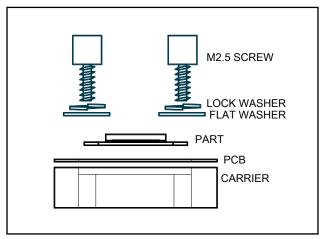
Part mounted with clamp, M2.5 screw, flat washer, and lock washer.
